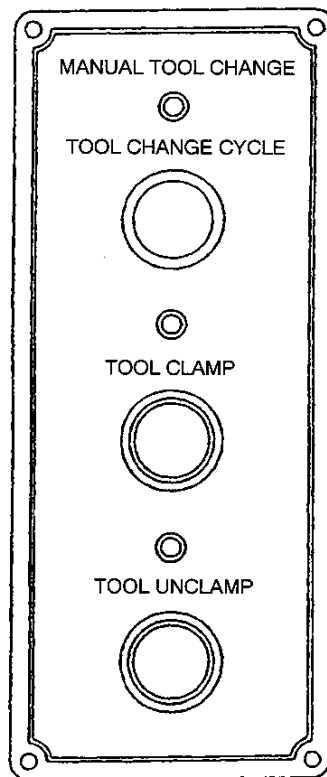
Manual Tool Change Operation Panel (Horizontal Machining Centers)
